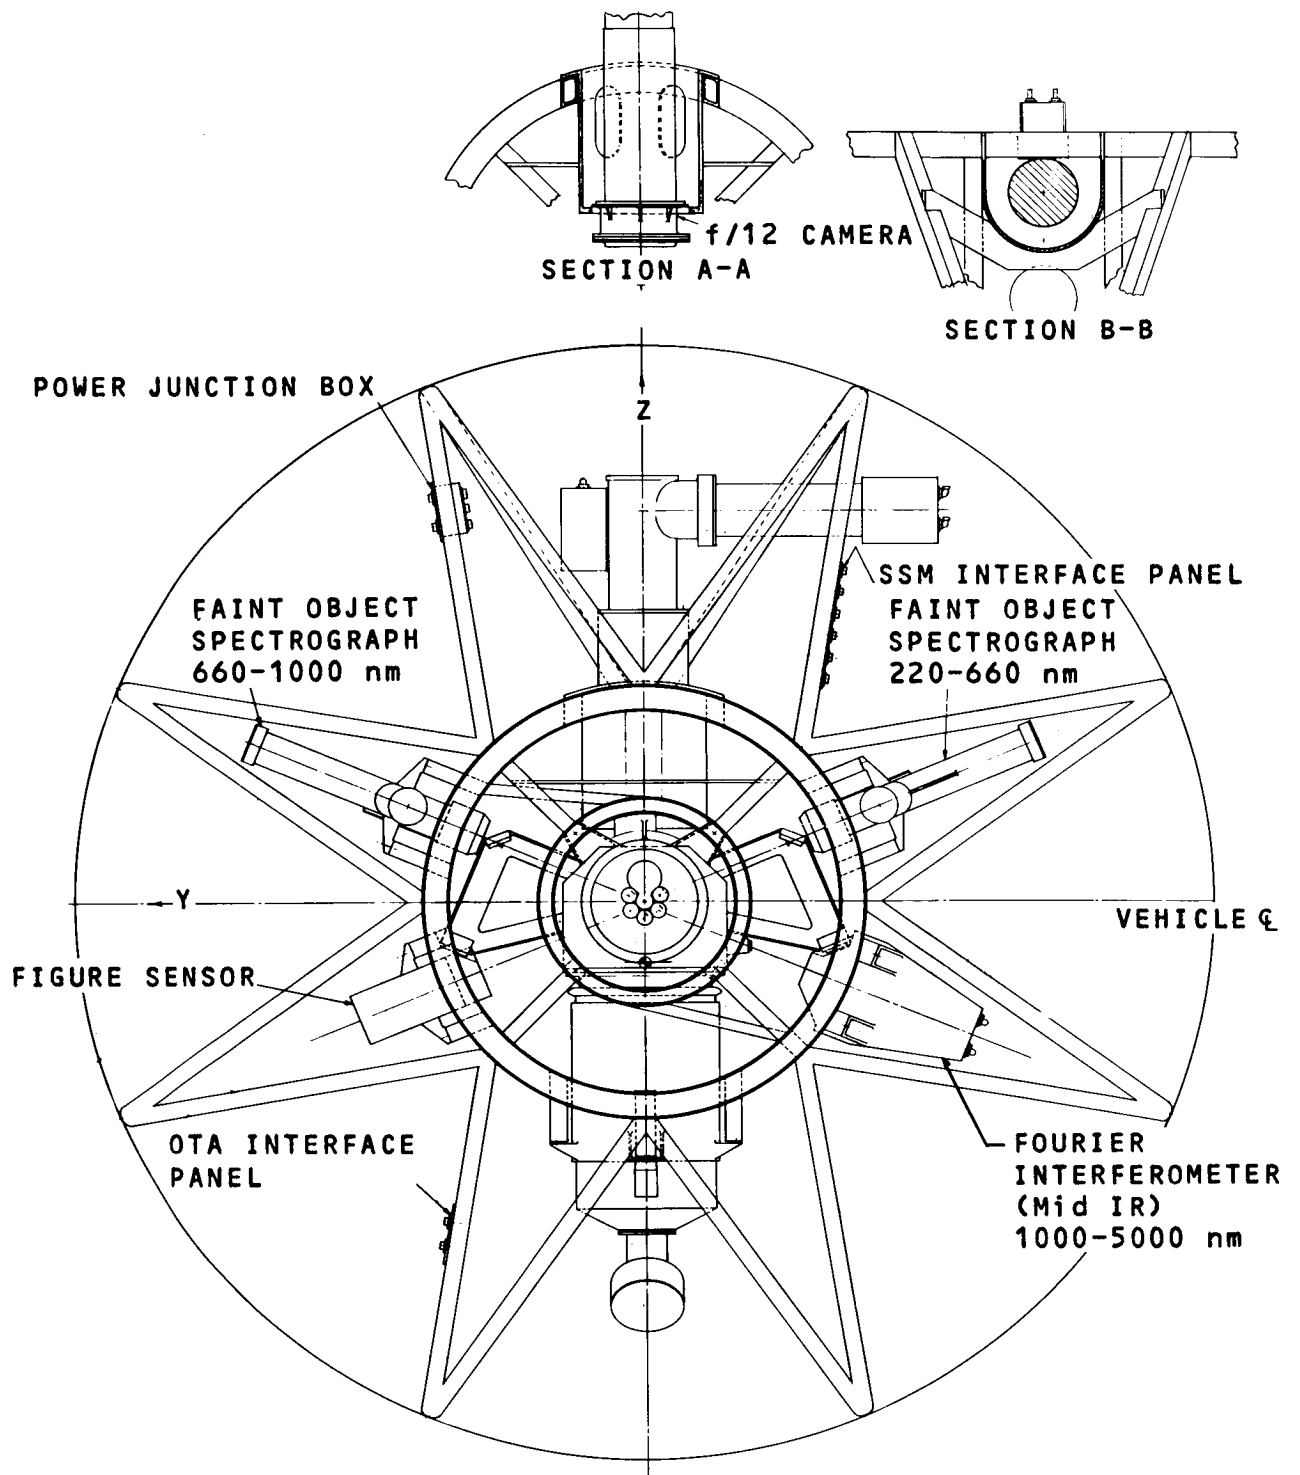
LST-SIP Assembly Layout (Sheet 1 of 2)
